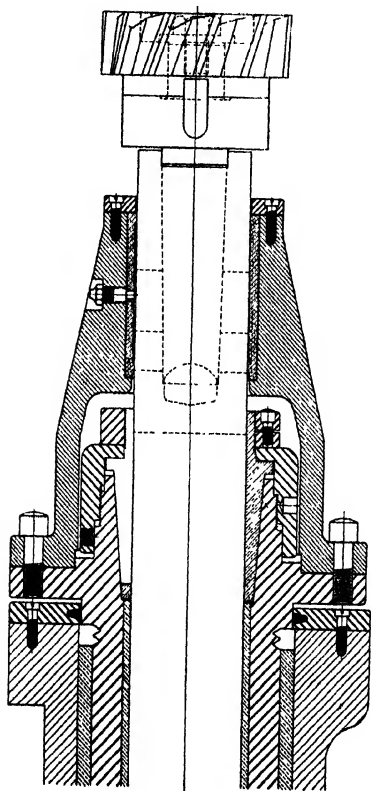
Cross-section showing one Method of Holding a Facing Cutter in a Richard Boring Machine Spindle.
